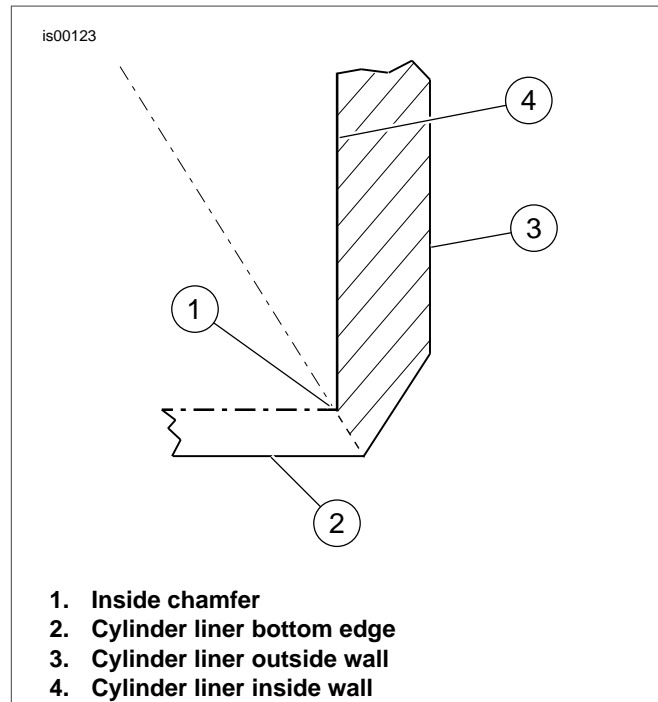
Inside Chamfer and Bottom Edge of Cylinder Liner
